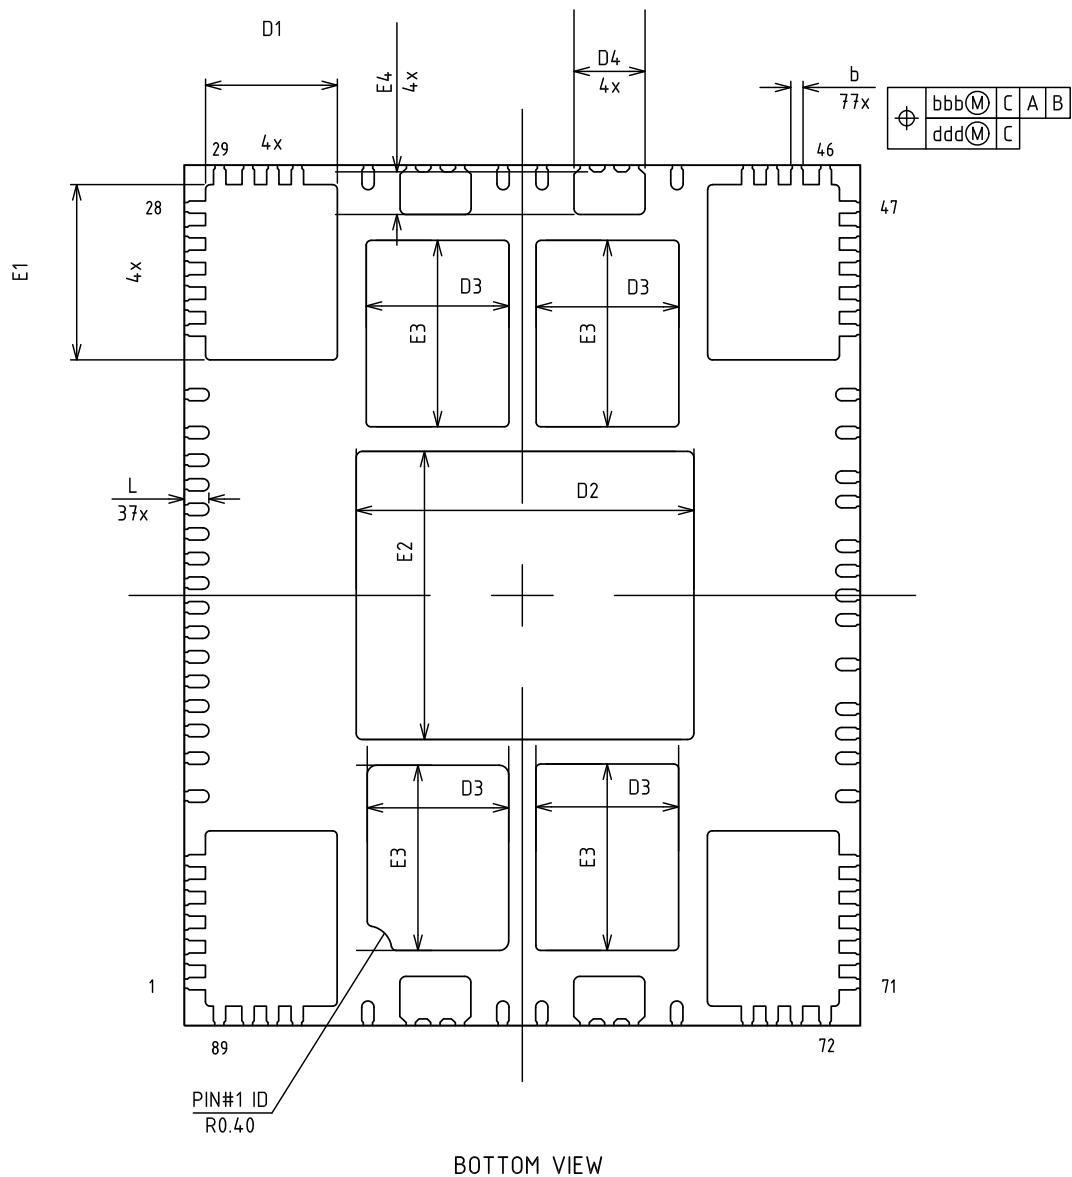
VFQFPN 11x14x1 package outline - pins identifier
